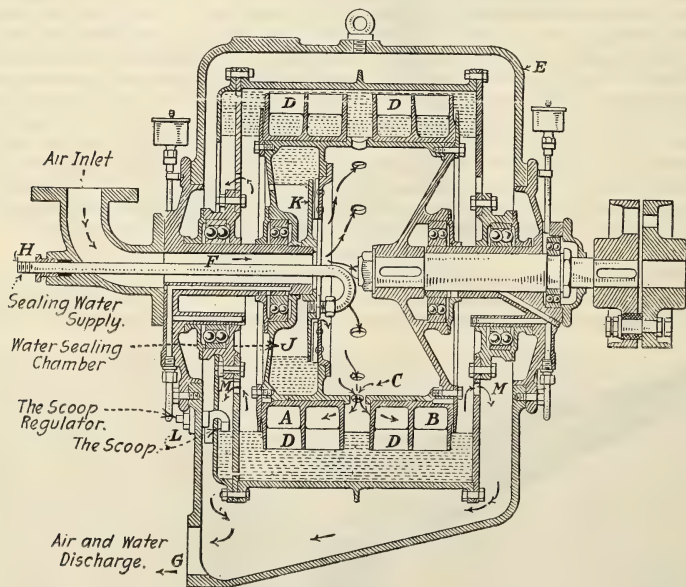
Globe-Johnston Rotary Vacuum Pump in Section.
